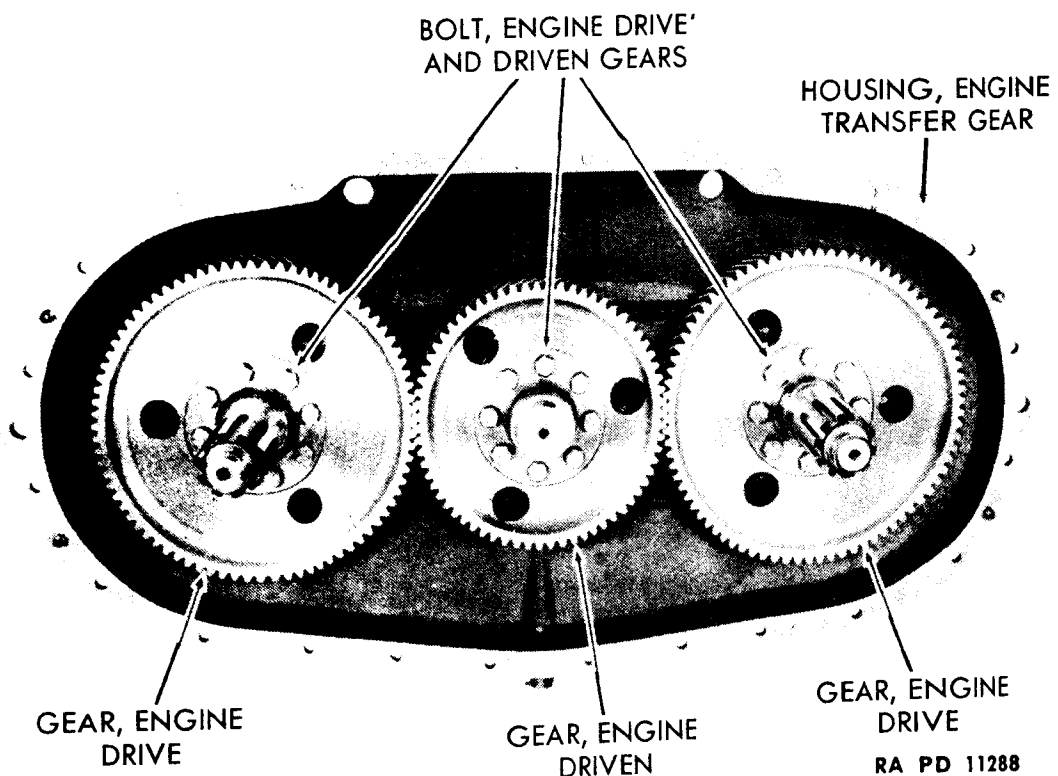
Engine Transfer Gear Housing with Driven Gear and Drive Gears in Place
